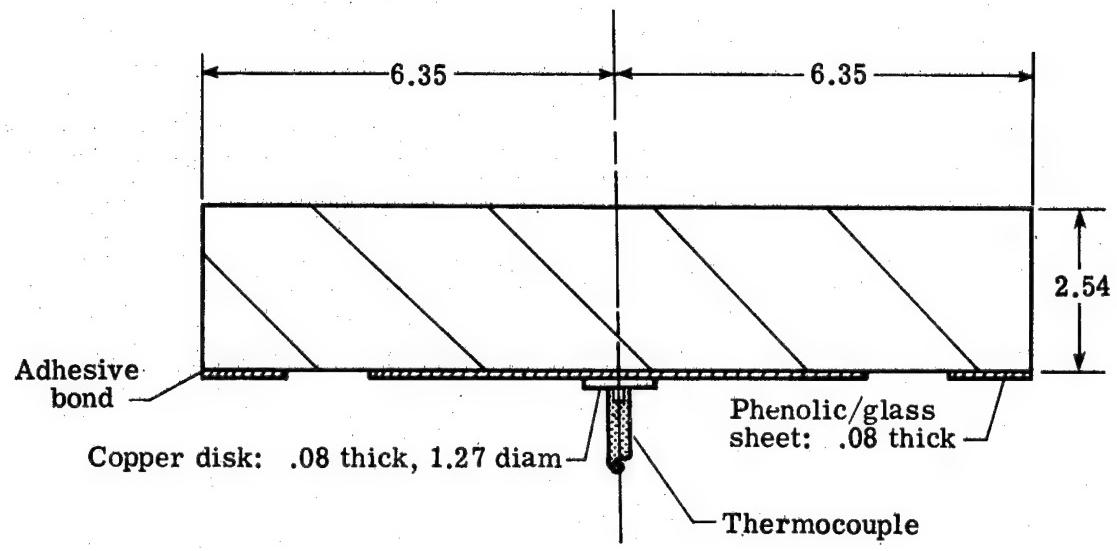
Section of typical test specimen. Dimensions are in cm.
